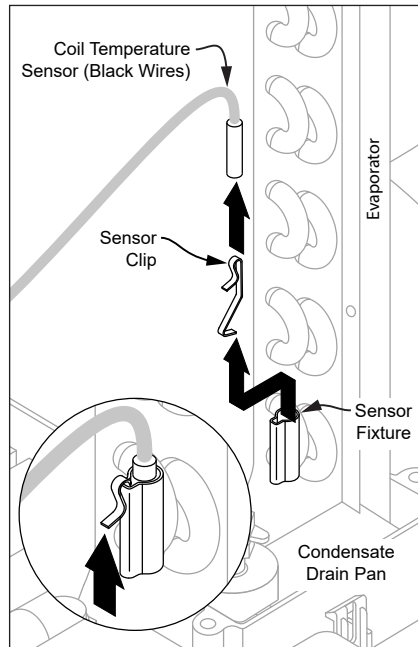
Coil Temperature Sensor (Located Bottom Right Side of Evaporator)
